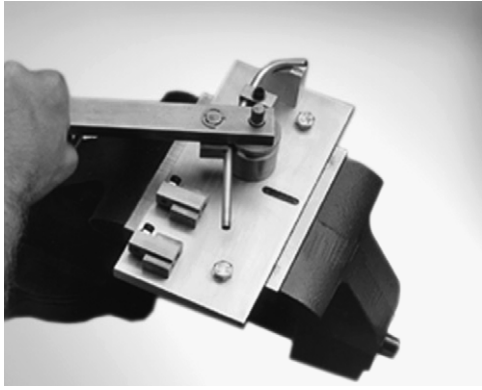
A dedicated tube bending fixture (Winton machine company) [31].
